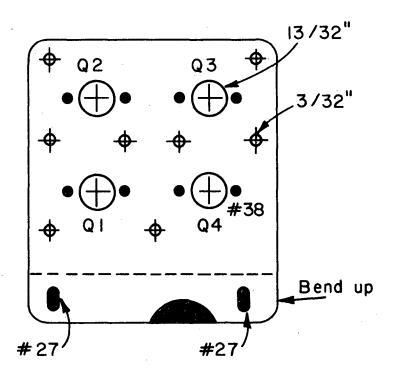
Layout template for af lock-in phase shifter. The phase shifter should be wired and stencilled prior to mounting. The darkened holes must match other components. Drill sizes are indicated by numbers shown.
